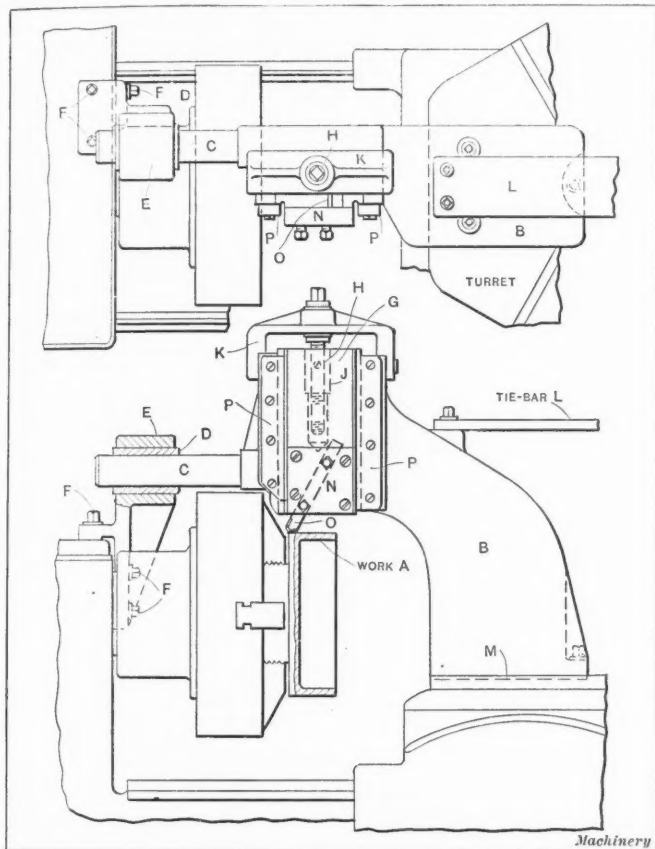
Adjustable Piloted Turning Tool for Large Work
